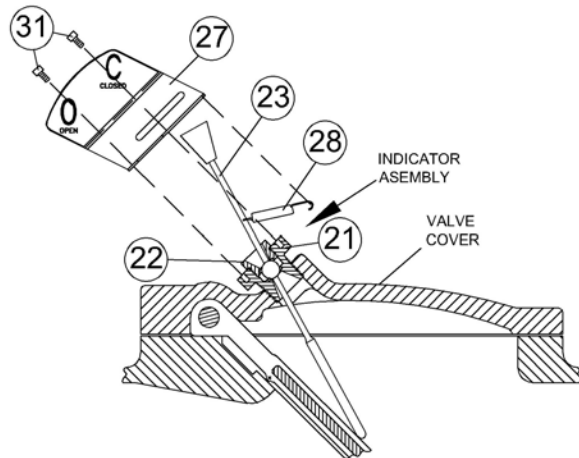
MECHANICAL INDICATOR ASSEMBLY
